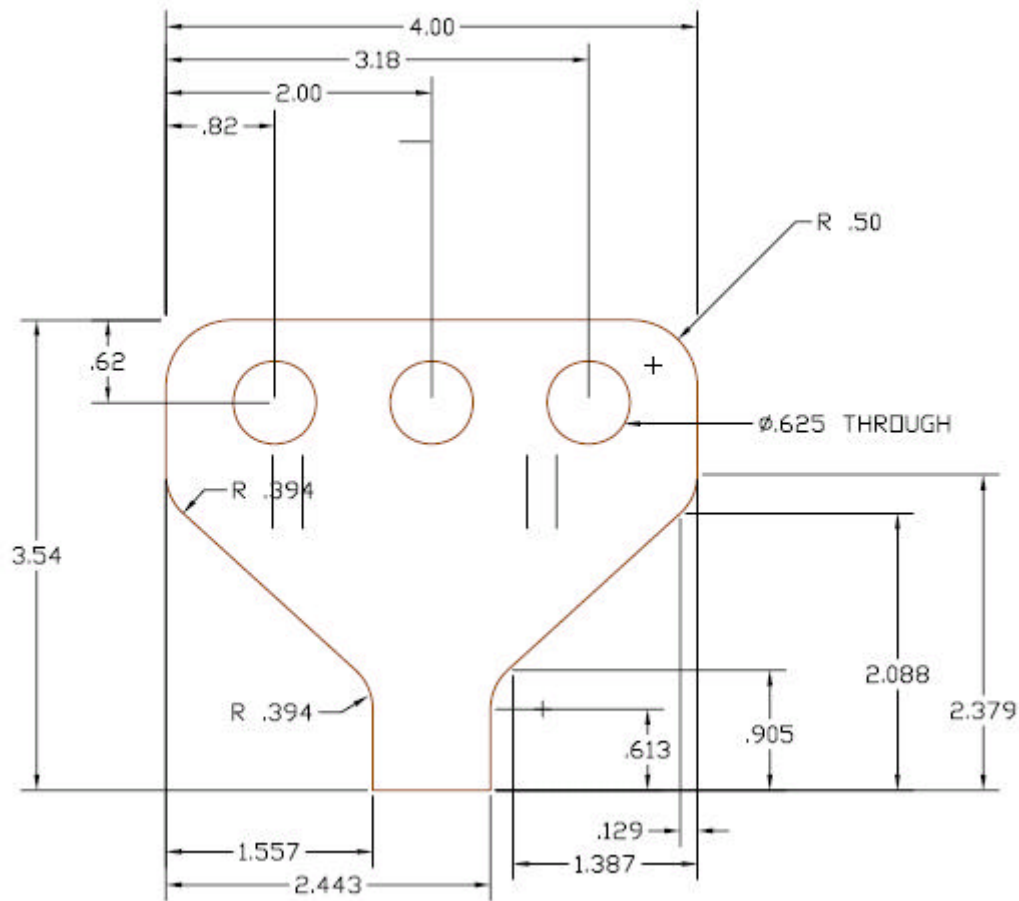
Drawing of the copper heater block from AutoCAD 2006.
